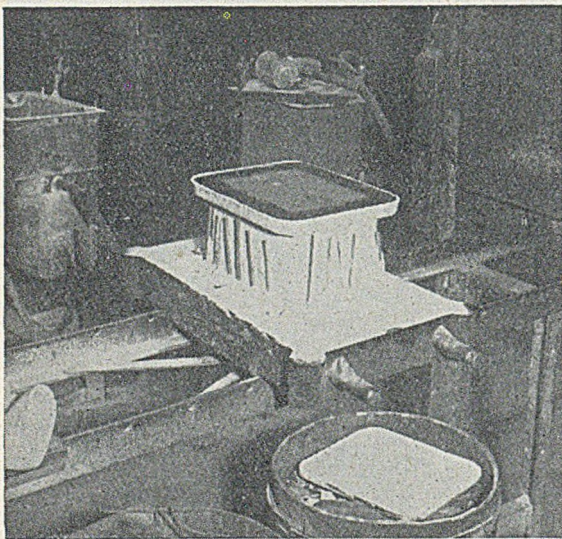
Second Half Mould as shown in Fig. 9 (top, right) in the Course of Production. For this Half, the Top is Blanked-off with an Asbestos Plate and Vertical Reinforcing Rods are incorporated.
